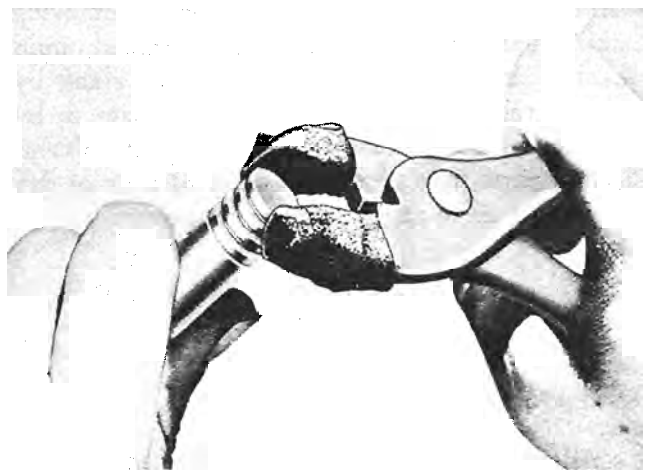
Removing Plunger From Hydraulic Unit With Taped Pliers.
